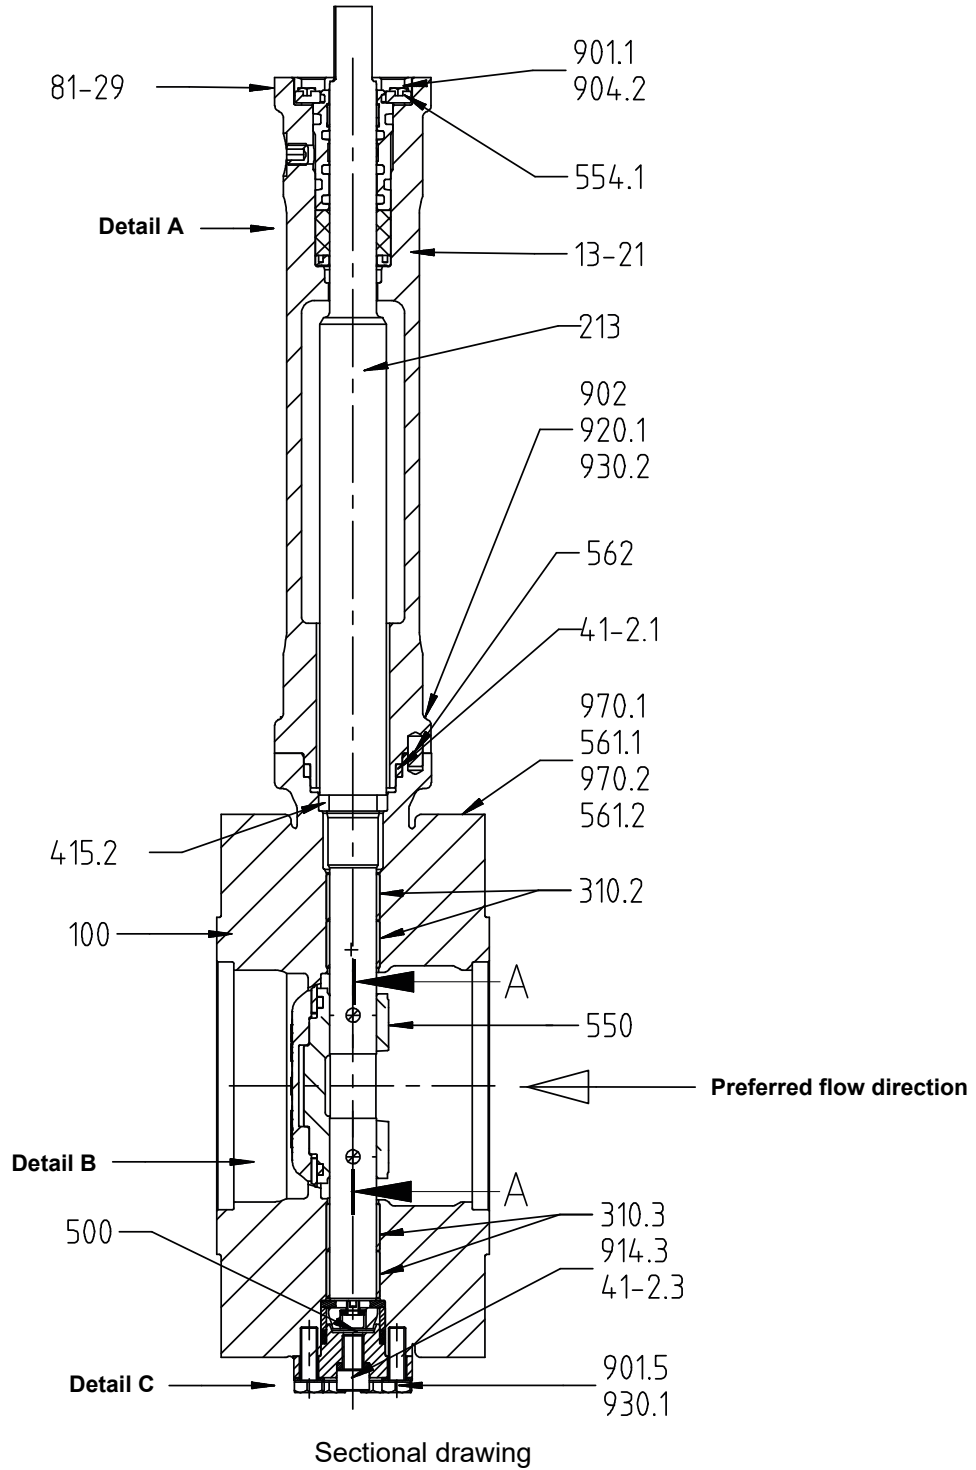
Sectional drawing of TRIODIS 300 CRYO T4 and T7 for DN 80 and 100 (3-4 in.)
